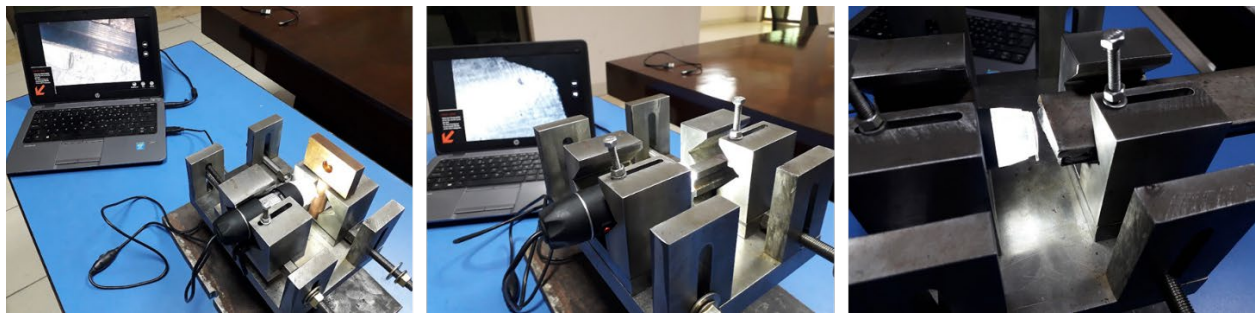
Inspection and measurement operations performed through the fixture.
